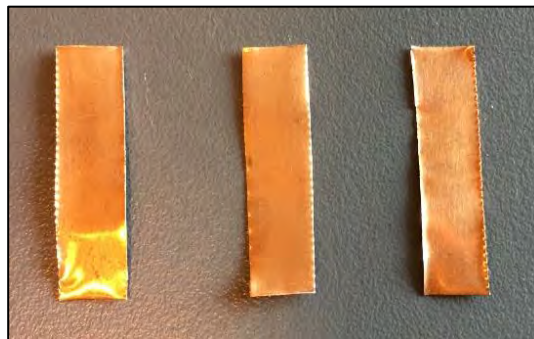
Copper strip with measurement 6 mm x 25 mm after being cut
